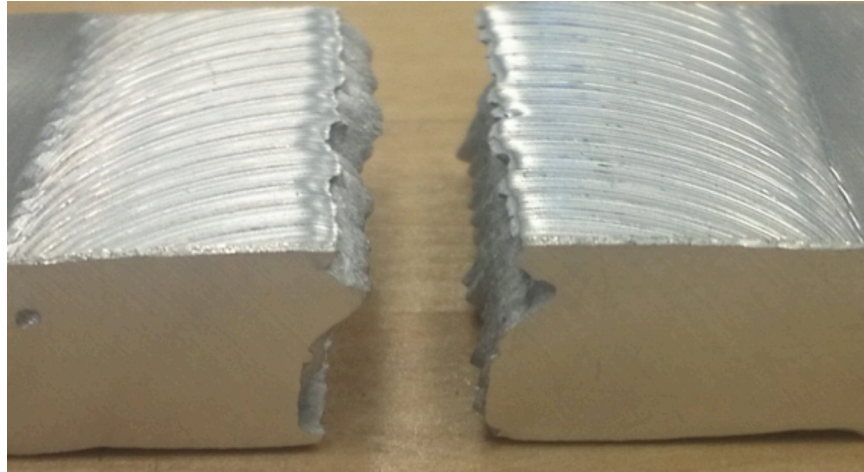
Fracture surface of laser cleaned weld (300 W, Adapt Laser Systems).
